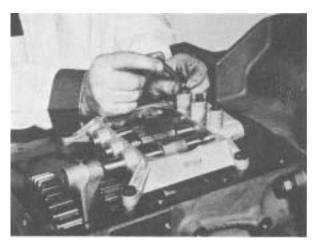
With transmission shifted into neutral, install shift control assembly. 2nd & 3rd and 4th & 5th shift forks set over shift hubs, 1st & reverse fork enters slot on 1st & reverse gear. Tighten bolts 20 to 25 ft. lbs. torque [27,2 - 33,8 N.m]. Position three mesh lock balls and springs in support housing.
